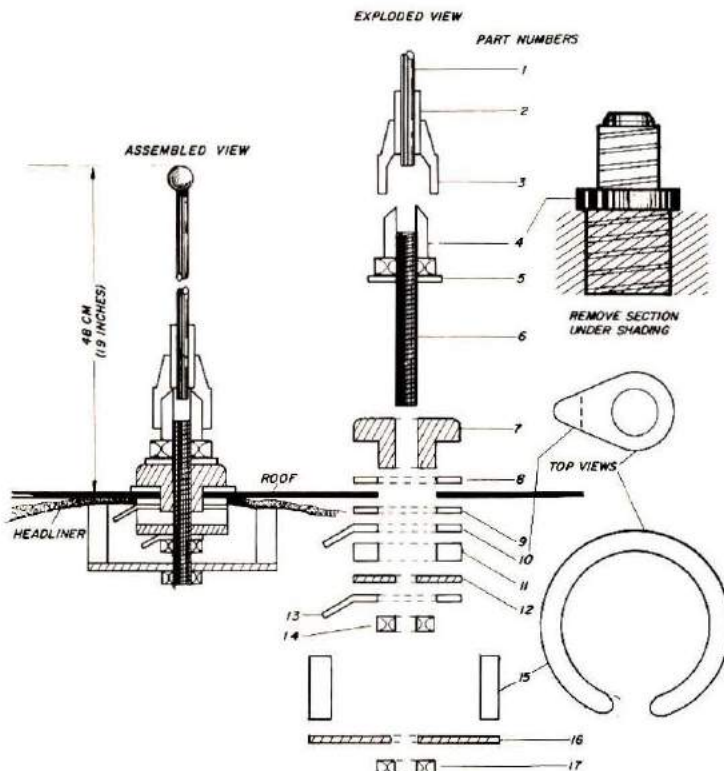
The drawing shows cross sections of the antenna assembled and "exploded." Parts 3 and 4 are a flared tubing fitting. Part 4 is modified as shown before it's assembled. All parts are round except the ground lug (part 10), the bottom spacer (part 15), and the center conductor lug (part 13). Top views of parts 10 and 15 are shown; part 13 is a common shakeproof lug and, therefore, a top view is not shown. The text discusses the parts and suggests way of simplifying construction in case you have to do your building without fancy tools.
